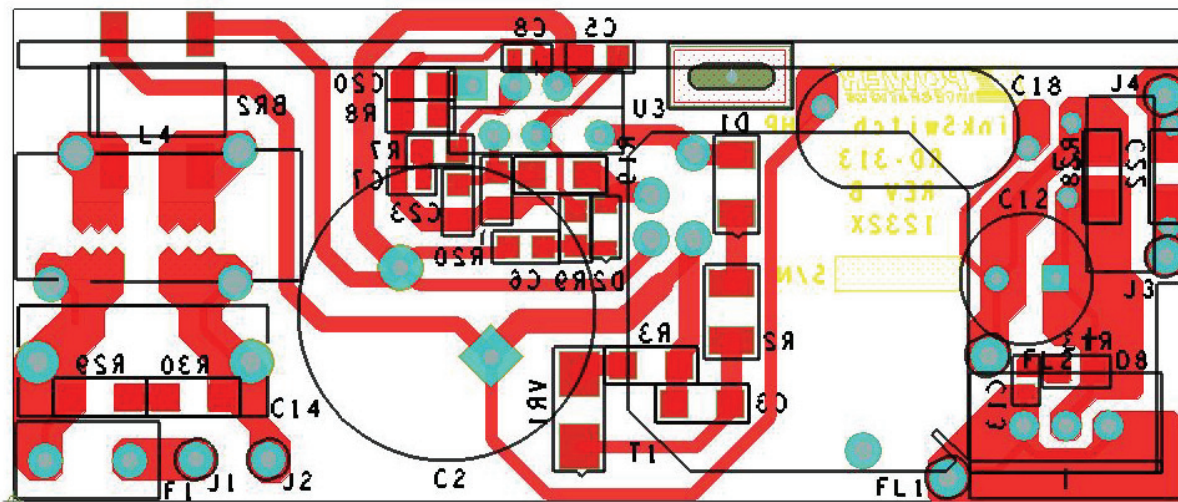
PCB Top/Bottom Side 2.76" (70.1 mm) x 1.16" (29.4 mm).
